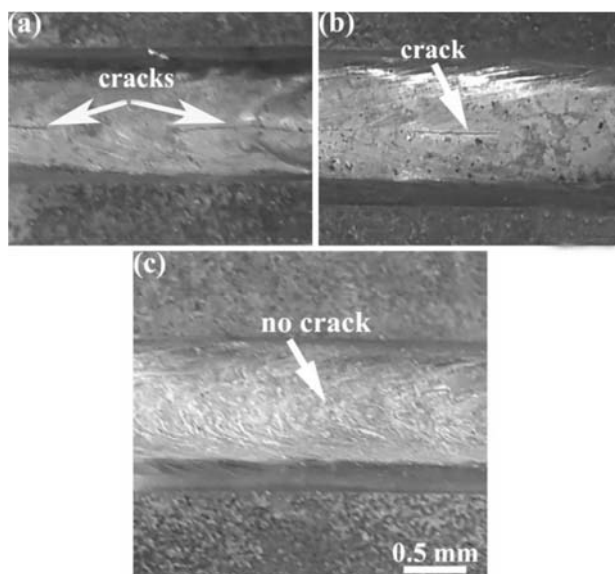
Weld beads with hot cracks (a) FCAW with Alloy 625 wire (b) FCAW with Alloy C-276 wire and (c) Super-TIG welding with Alloy 625 C-Filler after Fisco hot crack test
